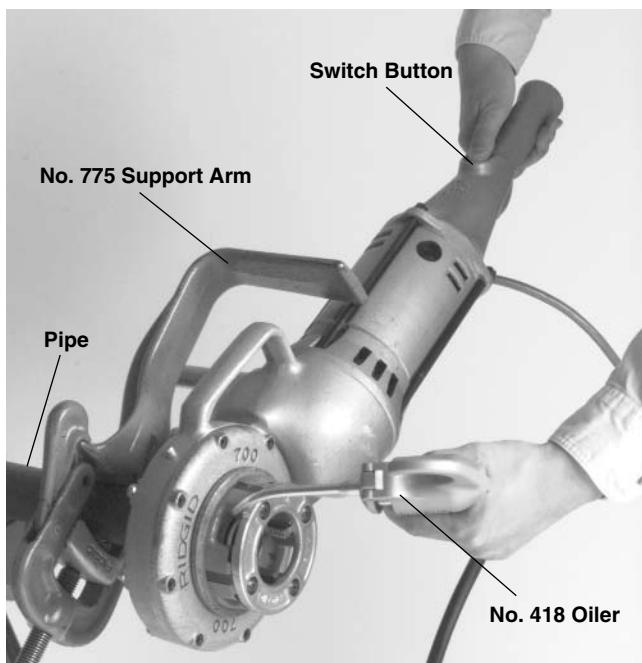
Threading 2" Pipe With Power Drive Positioned On Right Side Of Vise
